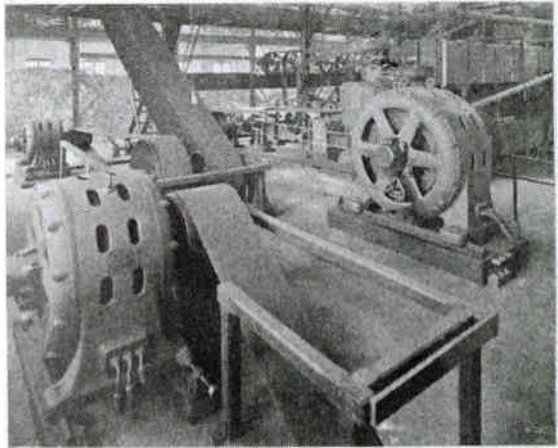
250 H.P. Motor Driving Eleven Centrifugal Screens, 75 H.P. Motor Driving Six Wet Presses and 150 H.P. Motor Driving Two 16 in. Centrifugal Stock Pumps, Fenimore Mill
